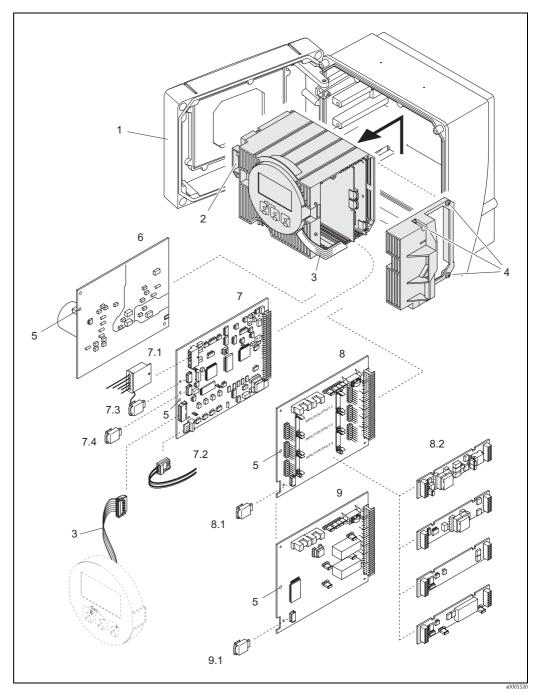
Wall-mounted housing: removing and installing printed circuit boards
